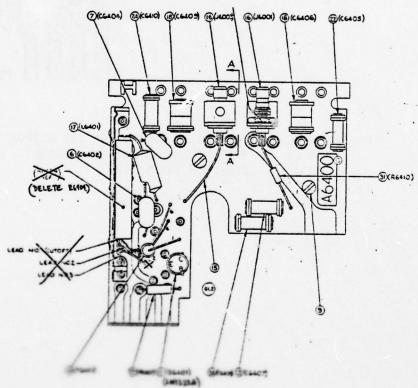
P.C. BOARD LAYOUT FOR THE A6300A TRANSMITTER MASTER OSCILLATOR ASSEMBLY (BACK SIDE)
